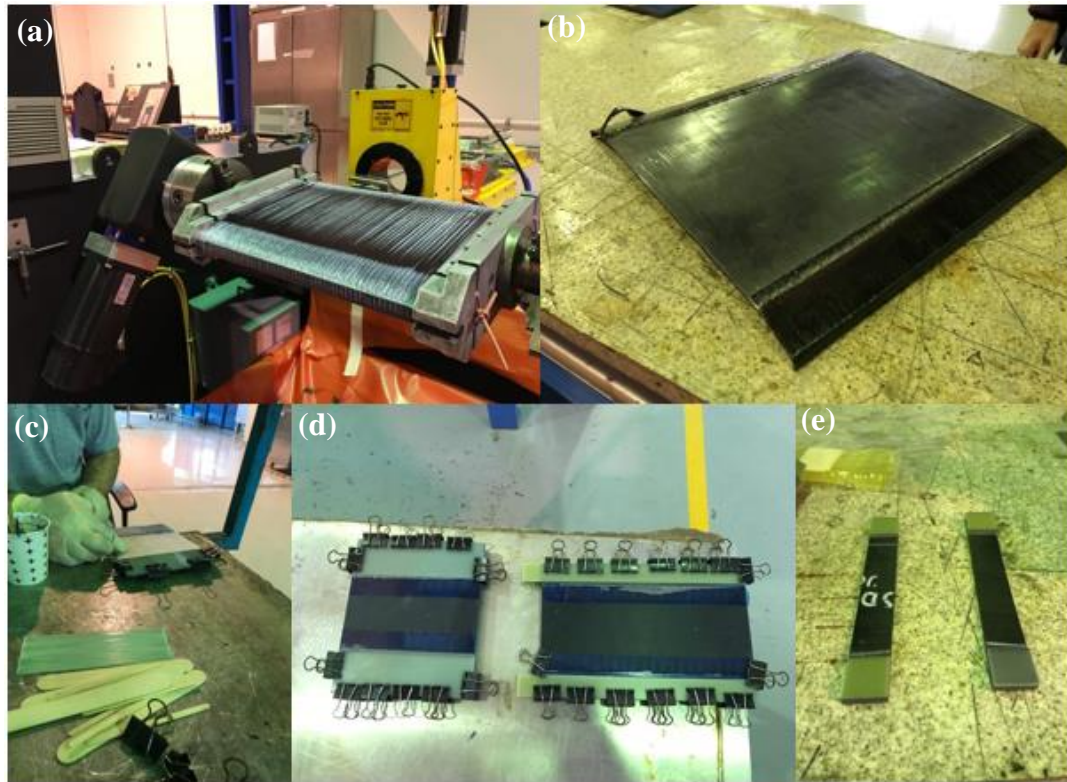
Manufacturing operations of carbon/epoxy mechanical testing coupons
